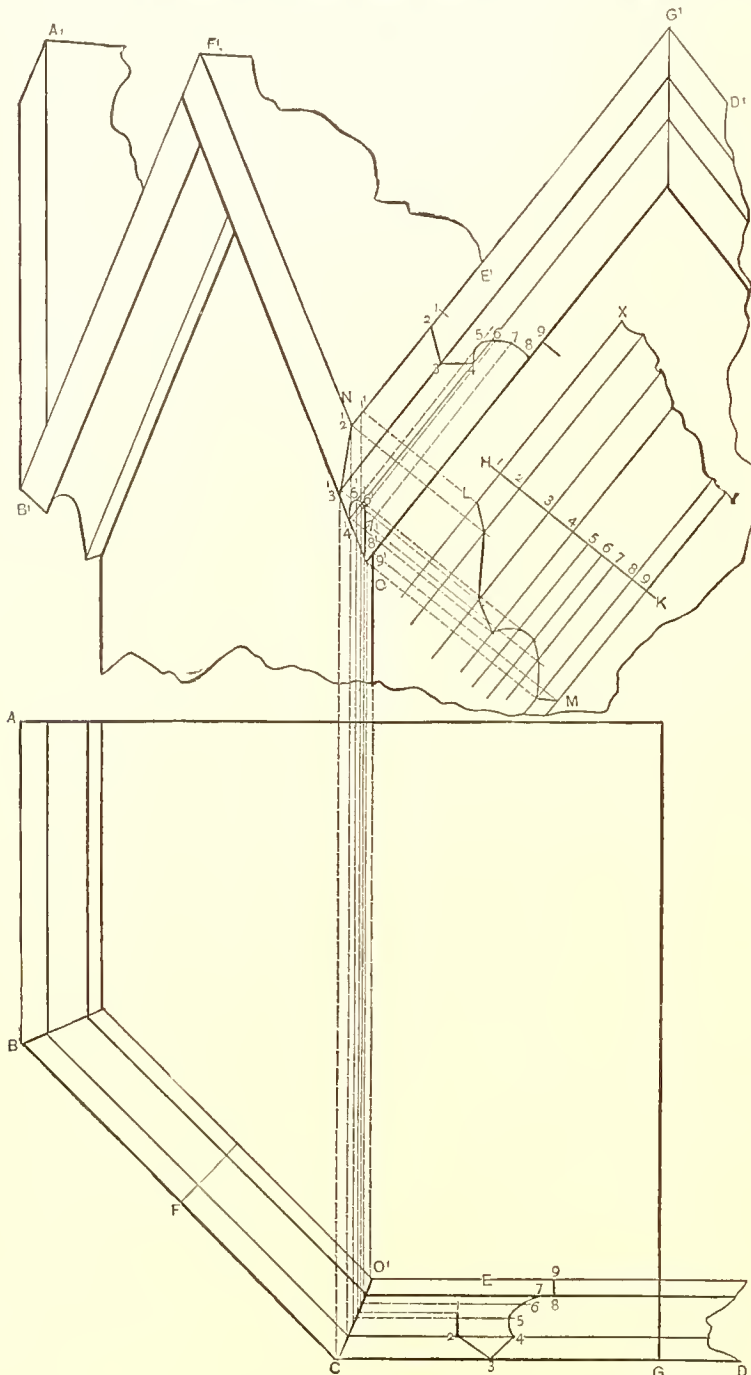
Quarter Plan and Elevation of Wide Side.
